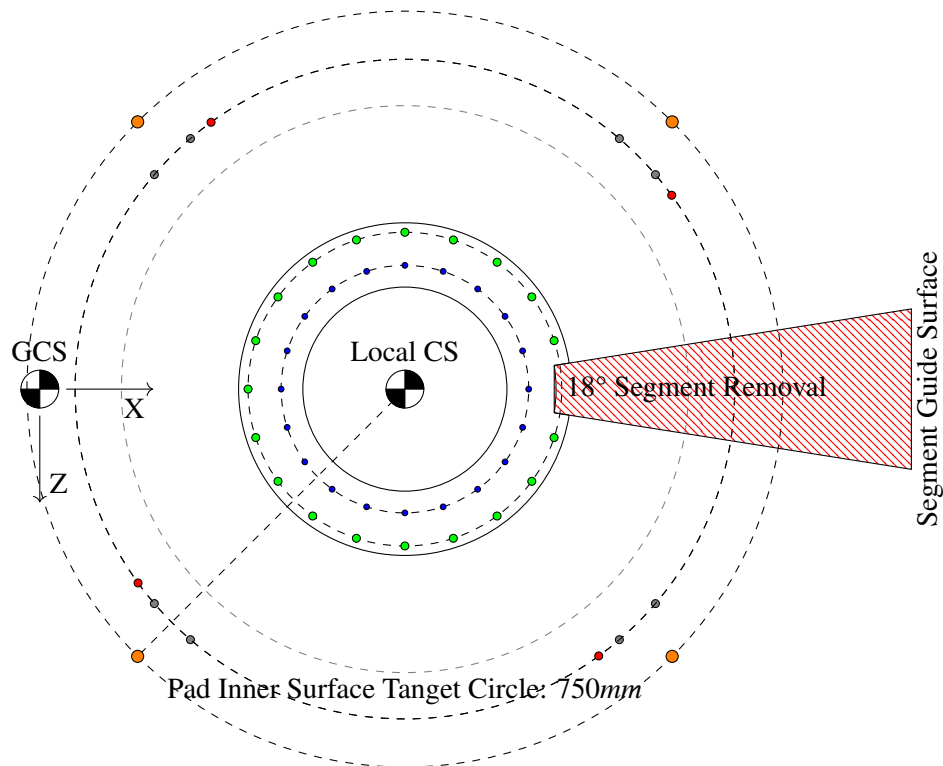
Upper Attachment Ring Geometry, $y = 5250mm$. Red hatch region to be unobstructed for segment removal (see section 4 for details)
